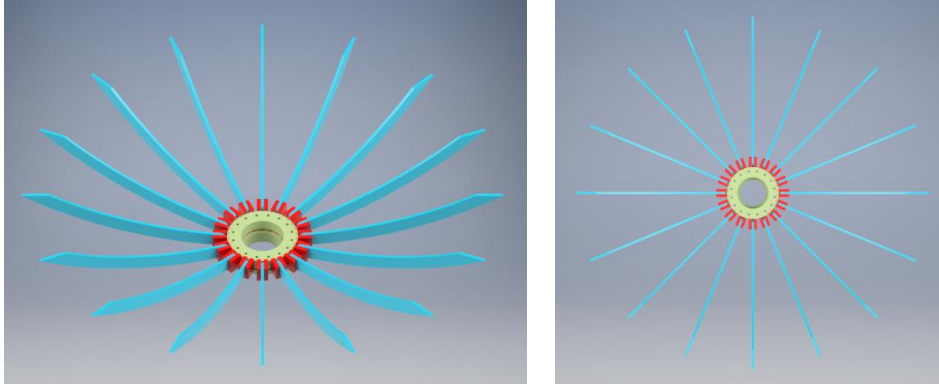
Quarter assembly of the prepared membrane patch and the radial folding deployment mechanism.
